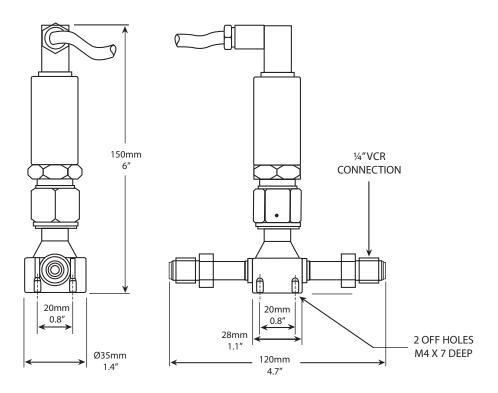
Pura Premium & Pura OEM Dimensional Drawings
